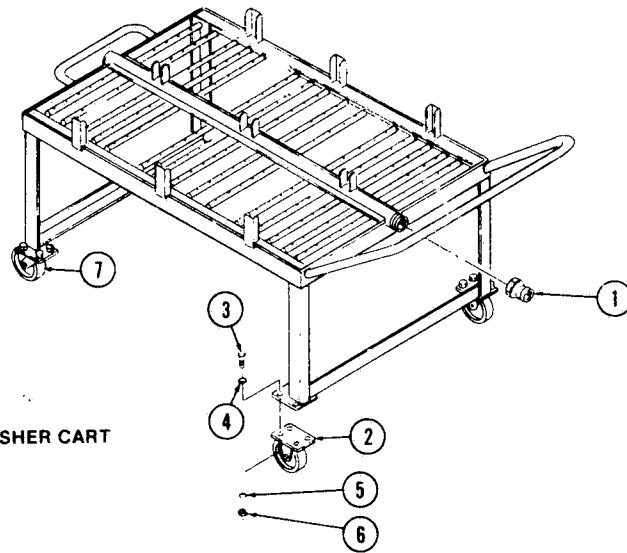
BOTTLE WASHER CART ASSEMBLY.
